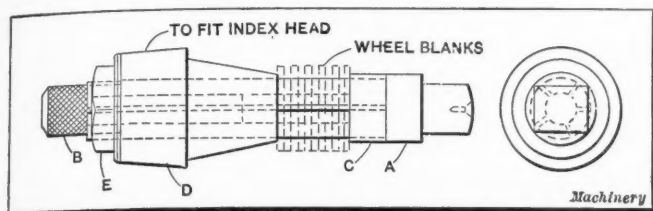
Arbor used on the Machine shown in Fig. 32 for Holding Brass Wheels
